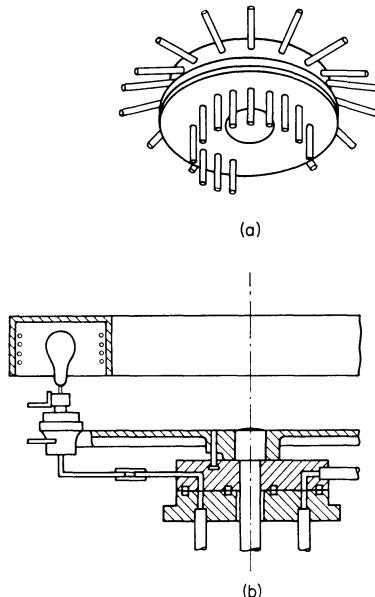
Lapped seal used in slide valve: (a) side view of slide valve; (b) cross section through the slide valve of an exhaust machine
